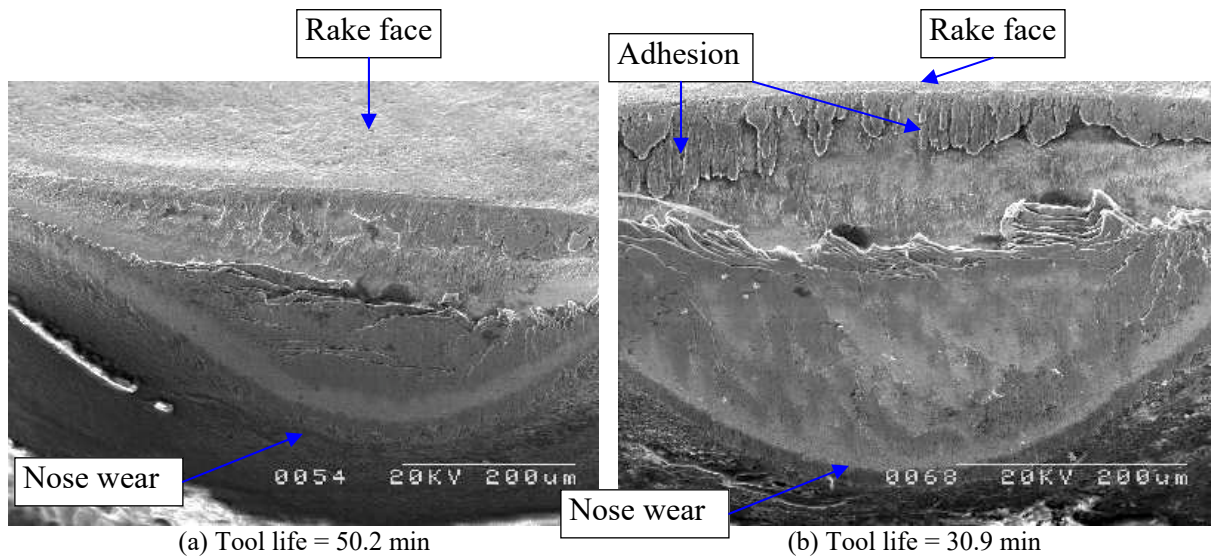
Nose wear at the cutting edge of T4 coated carbide insert after machining Ti-6Al-4V alloy with a coolant pressure of 20.3 MPa at a speed of (a) 110 m min⁻¹ and (b) 120 m min⁻¹.
